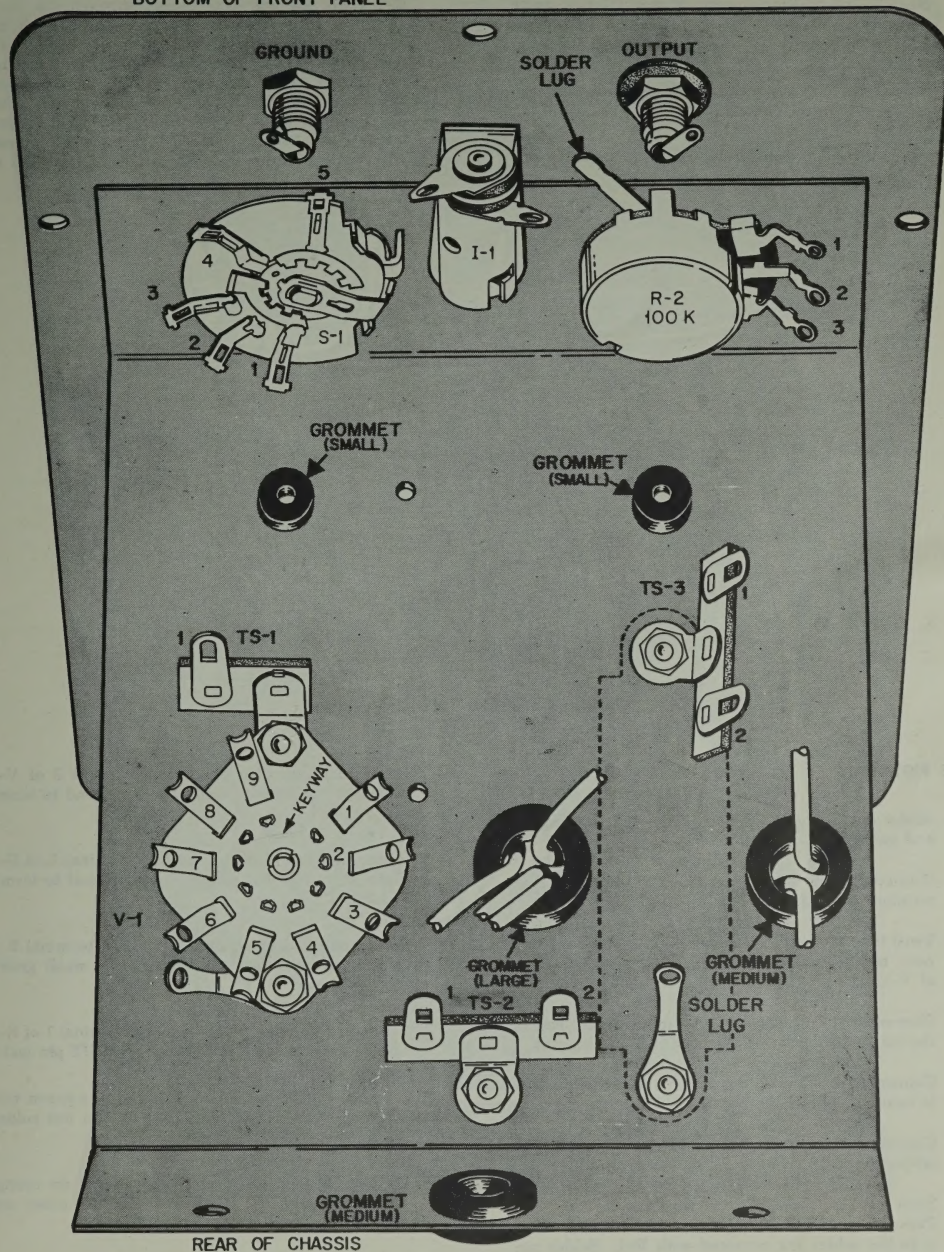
MOUNTING PARTS ON THE CHASSIS
